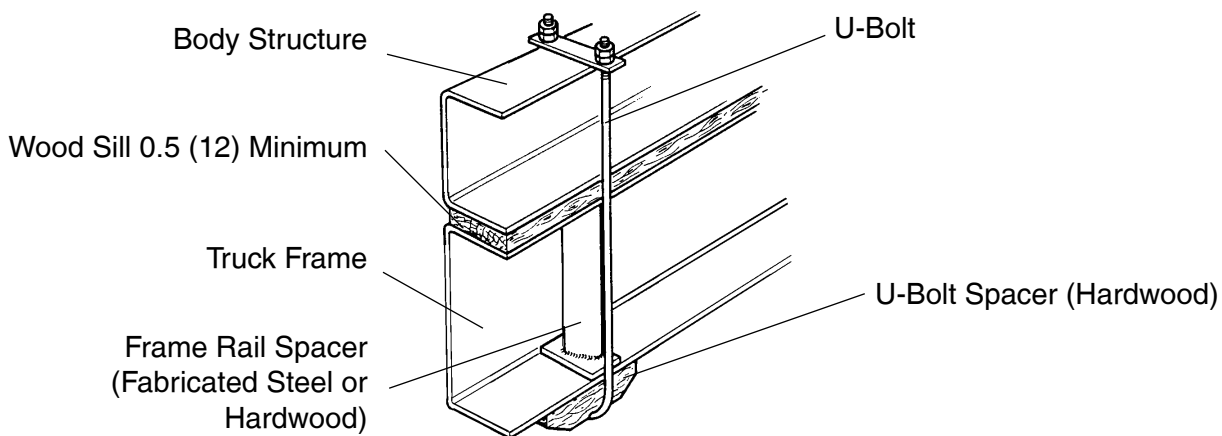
Acceptable U-Bolt Mounting with Wood and Fabricated Spacers [inch mm]
